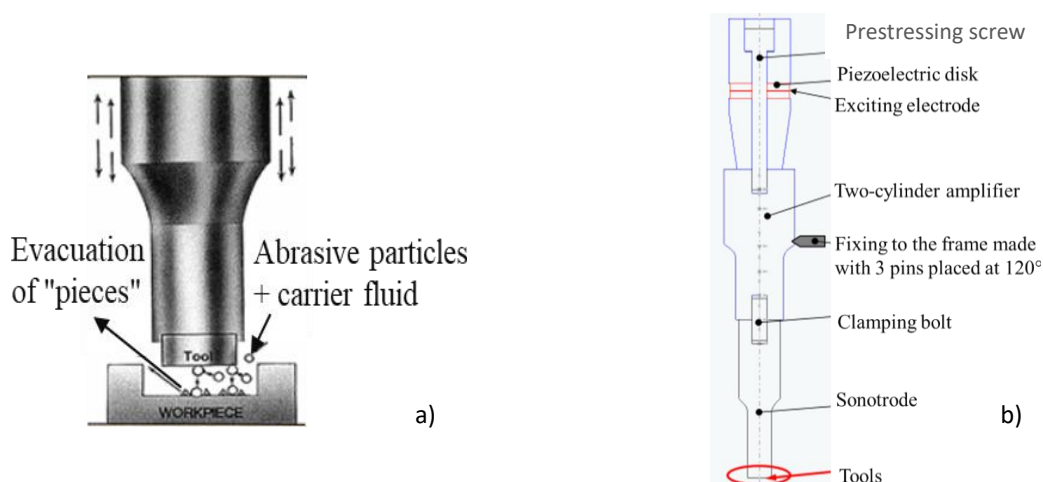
a) Principle of the ultrasonic machining b) Description of the ultrasonic machine.
